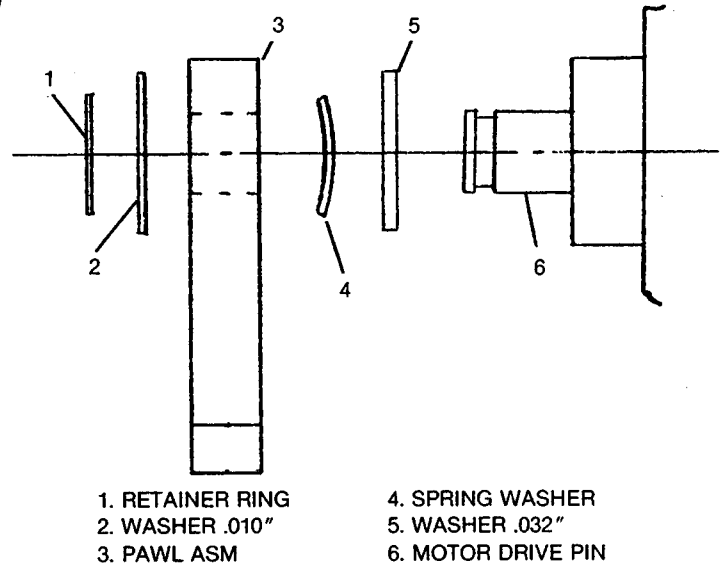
B — DRIVING PAWL ASSEMBLY DETAILS
